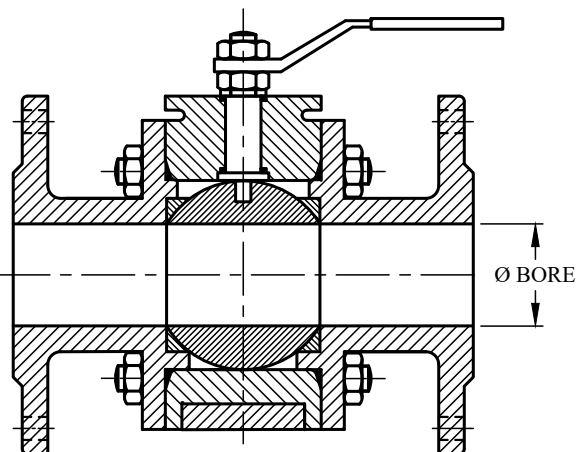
C THREE PIECE FLANGED ENDS CONSTRUCTION
